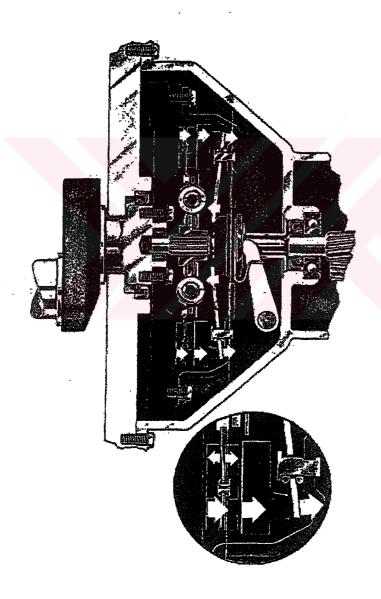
Disengagement of A Diaphragm Spring Clutch [20]
